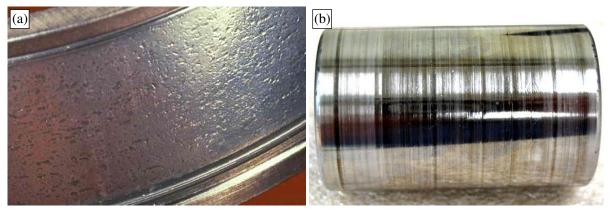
Bearing surfaces damaged by abrasive wear: (a) dull surface and visible dents (craters) on inner ring and (b) scratching and pronounced grooves on rollers.
